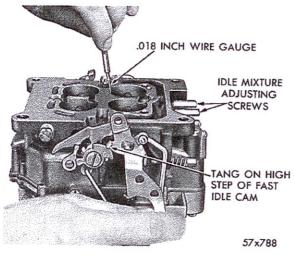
Checking Fast Idle Adjustment (Rear Carburetor)
